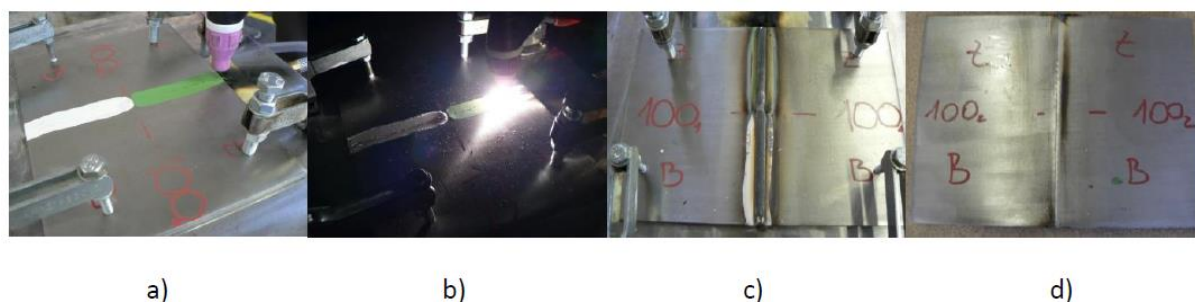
Weldment during robot ATIG welding process (welded by welding current 100 A); a) before welding, b) during welding, c) after welding - face side, d) after welding - root side
